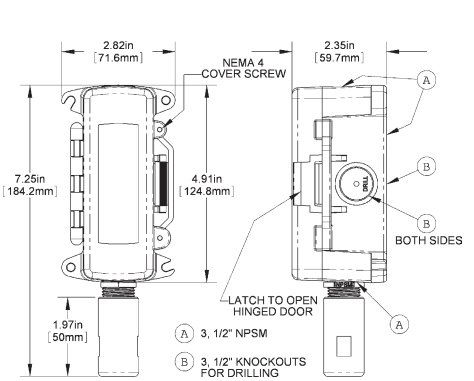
BB2, 1" Buffer w/plastic Threaded Fitting
